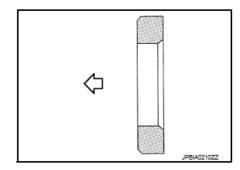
Identifying Pilot Converter With Chamfered Side Facing Crankshaft Area Courtesy of NISSAN NORTH AMERICA, INC.
